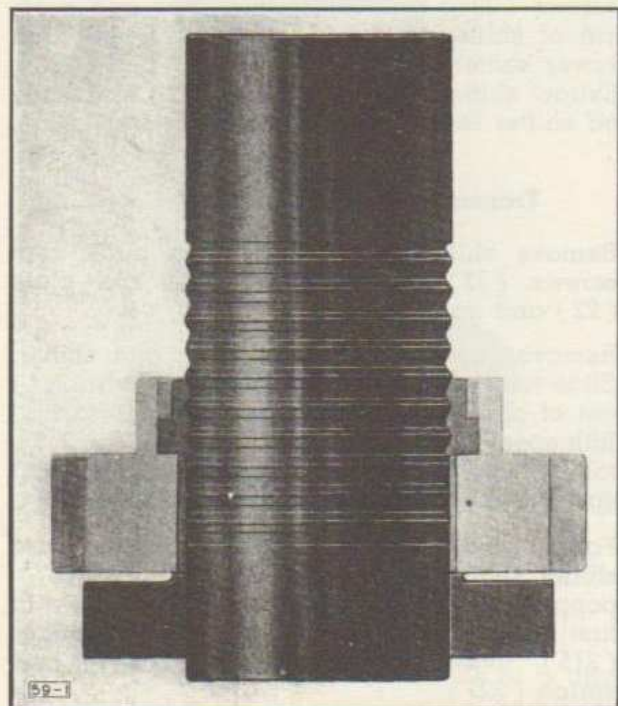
View of Broaching Tool Used When Installing New Gear Bushings
